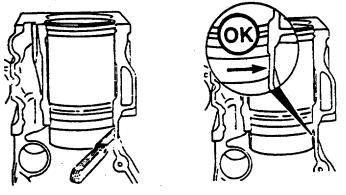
Liner and Lower Liner Bore Clearance.
